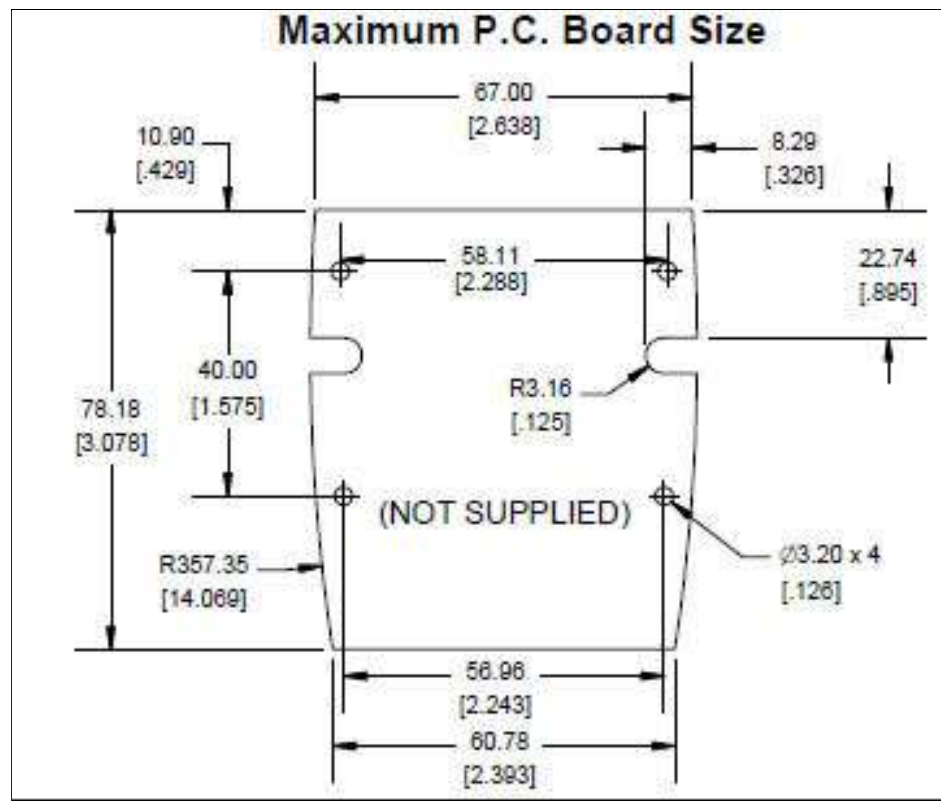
Module PCB dimension details in mm and [inches] (PCB top is down)
